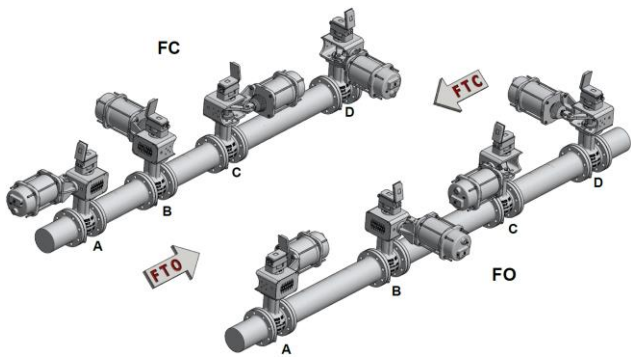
Installation positions in horizontal pipeline / Valve with Type R Actuator
